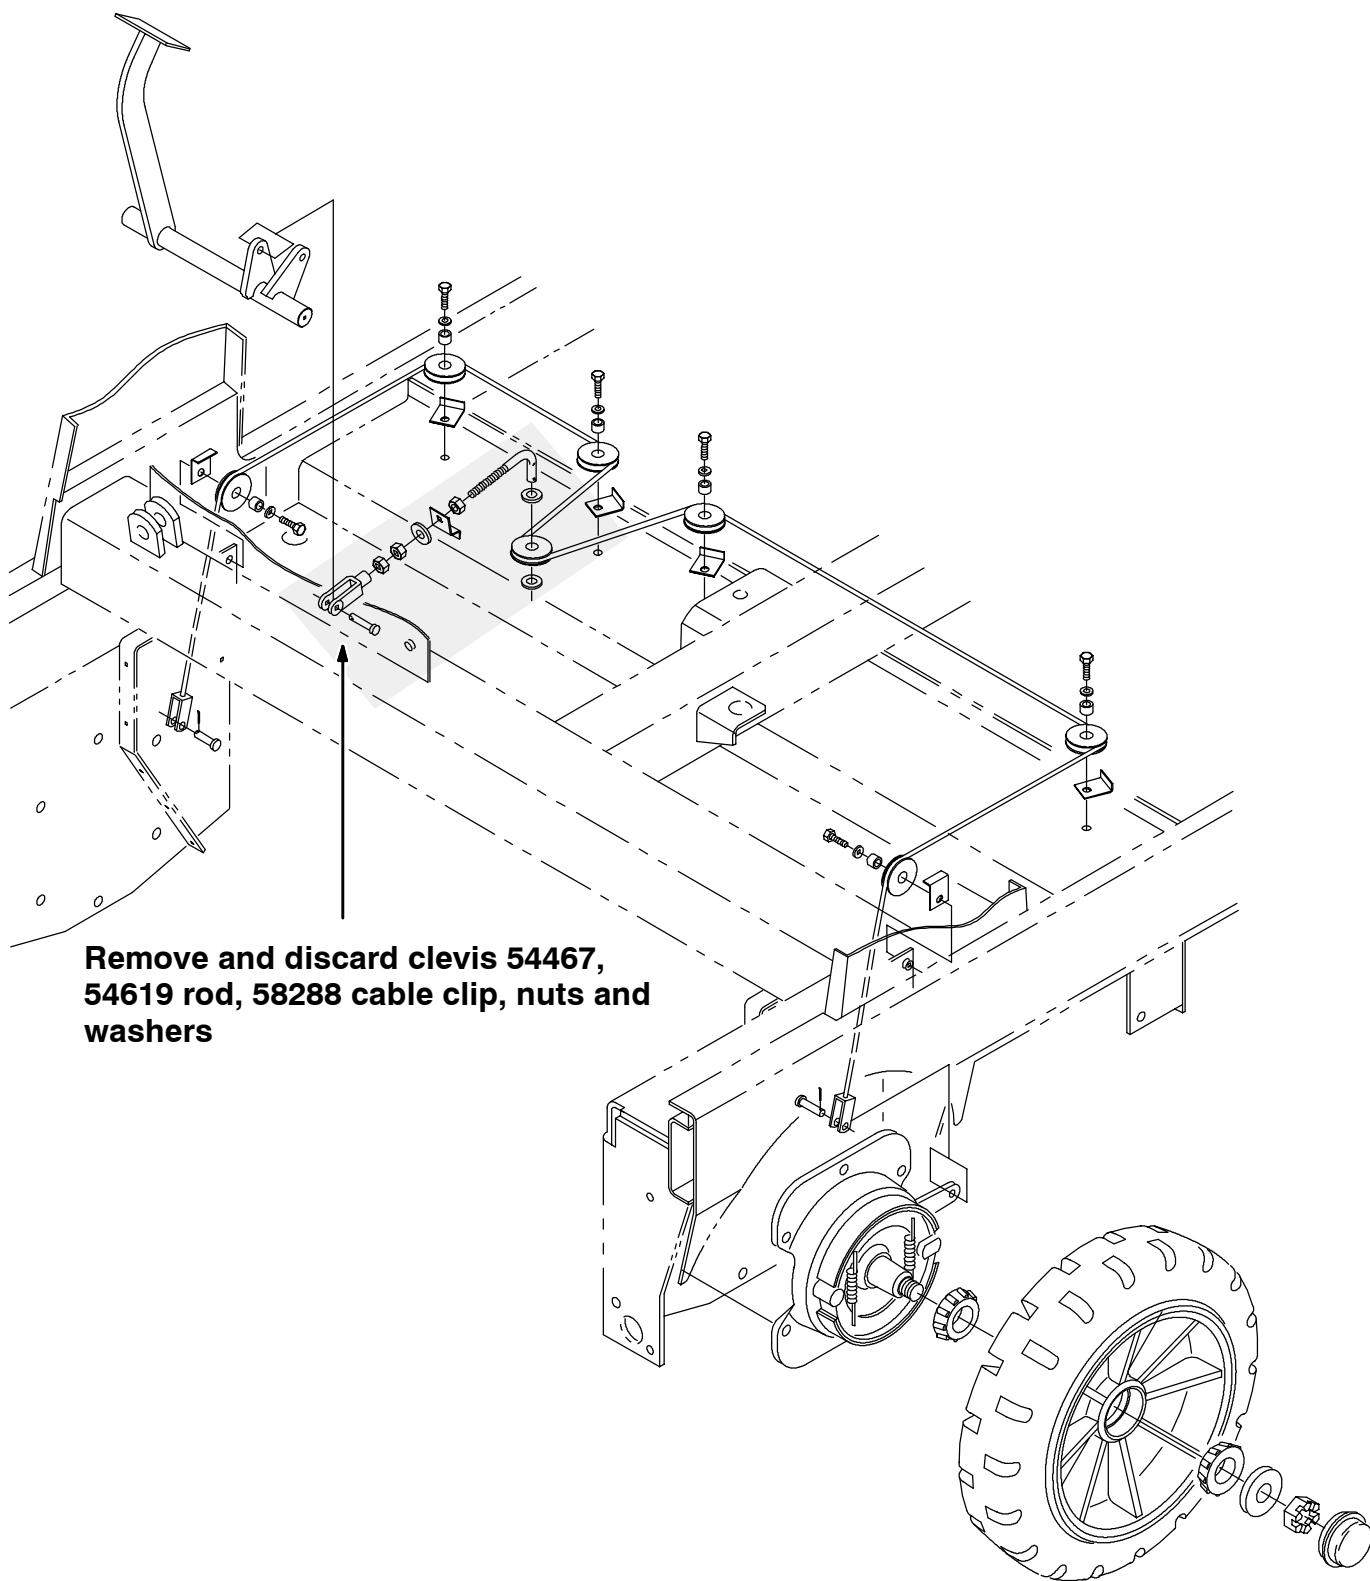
OLD BRAKE CABLE CONNECTOR REMOVAL
